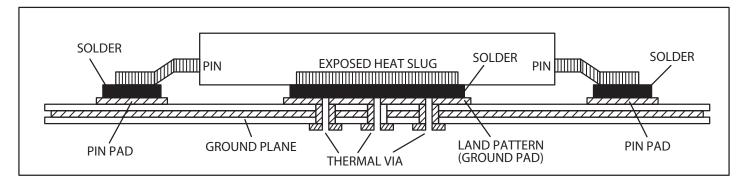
Assembly for Exposed Pad Thermal Release Path - Side View (drawing not to scale)
